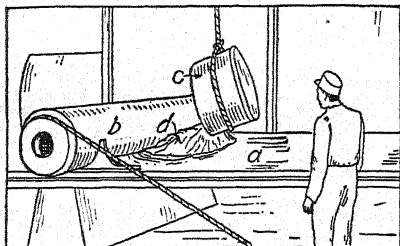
Older method of casting plate glass. *a.* Casting table. *b.* Roller. *c.* Pot for molten glass. *d.* Plastic glass.
